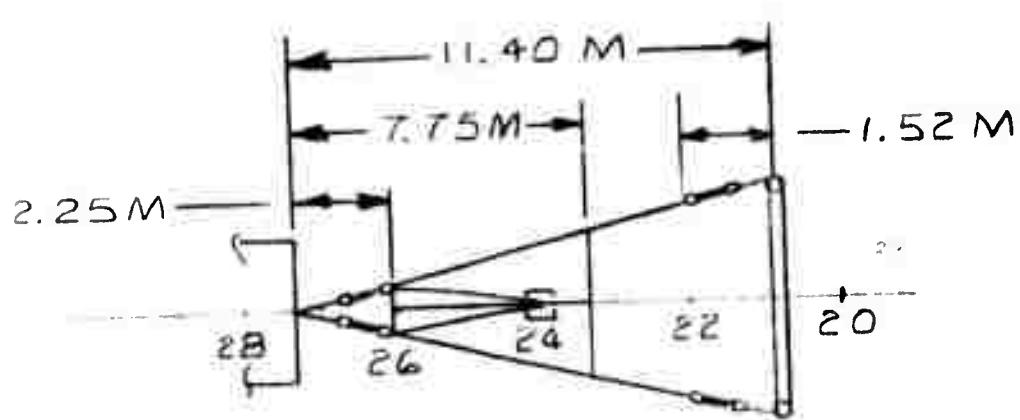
PROPOSED SYSTEM ARRANGEMENT
